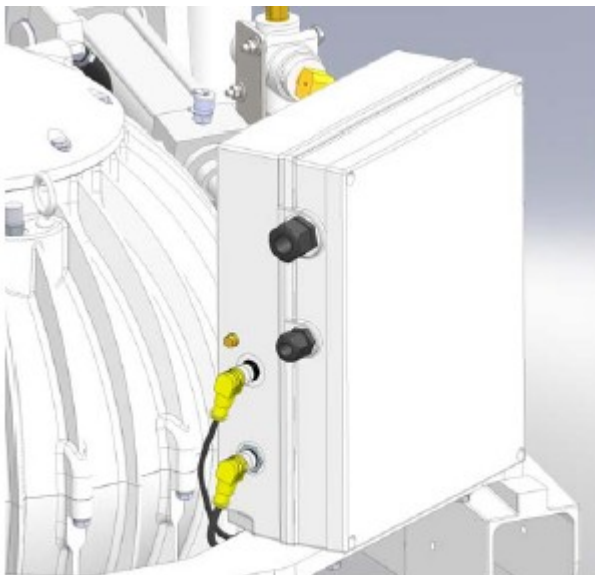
COMPACT MOTOR DRIVE BOX (Left)
